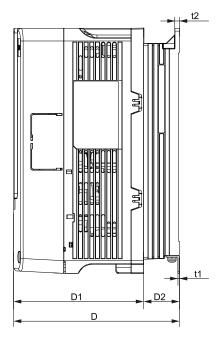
Exterior and Mounting Dimensions Diagram 1
